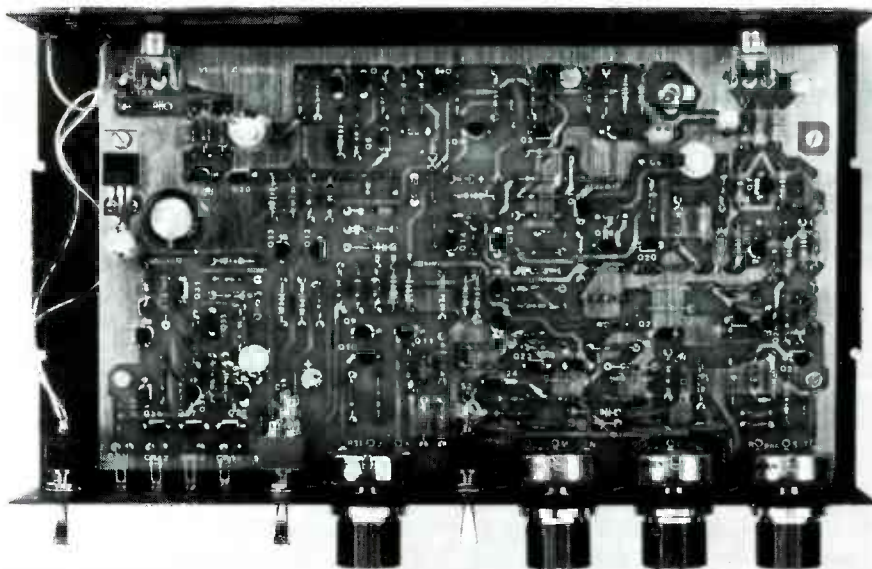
A METAL CASE IS NECESSARY to ensure shielding. The potentiometers and phono jacks are mounted directly to the board without interconnecting wires.
